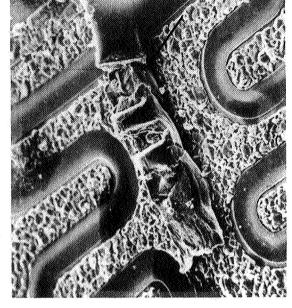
Manufacturer "B" 2N2222A, Serial Number 76, Emitter Die Side Bond, Ultrasonic.
